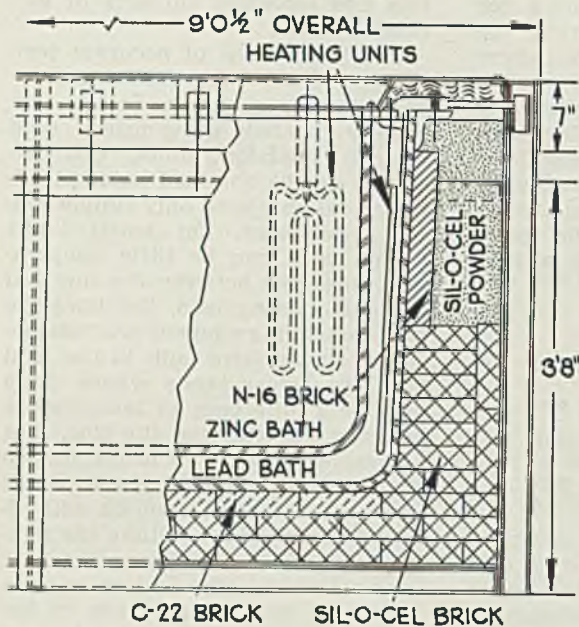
Construction details of lead jacketed galvanizing pot like that shown in Fig. 2
